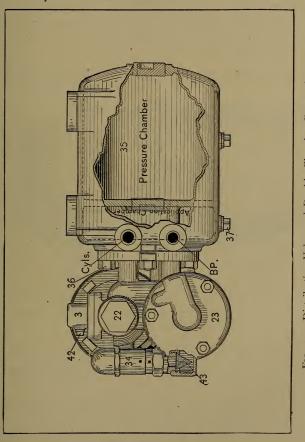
Distributing Valve and Double Chamber Reservoir.
